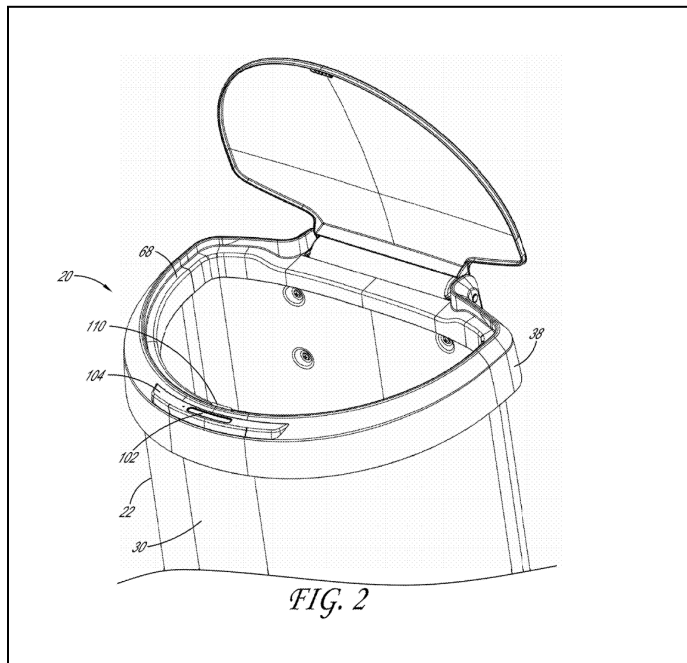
Patent drawing of a sensor-operated trash can illustrating its automated lid operation mechanism.
